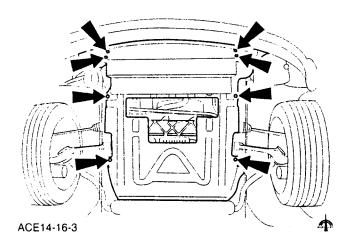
Retaining bolts of lower engine cover. (Escort shown)
